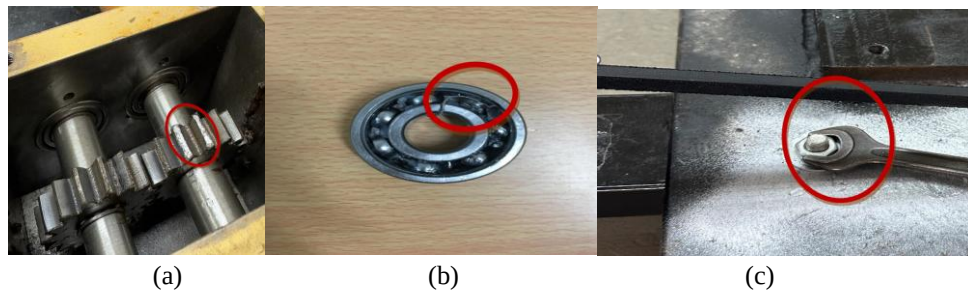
Faults in gears (a), bearing (b), and looseness (c)
